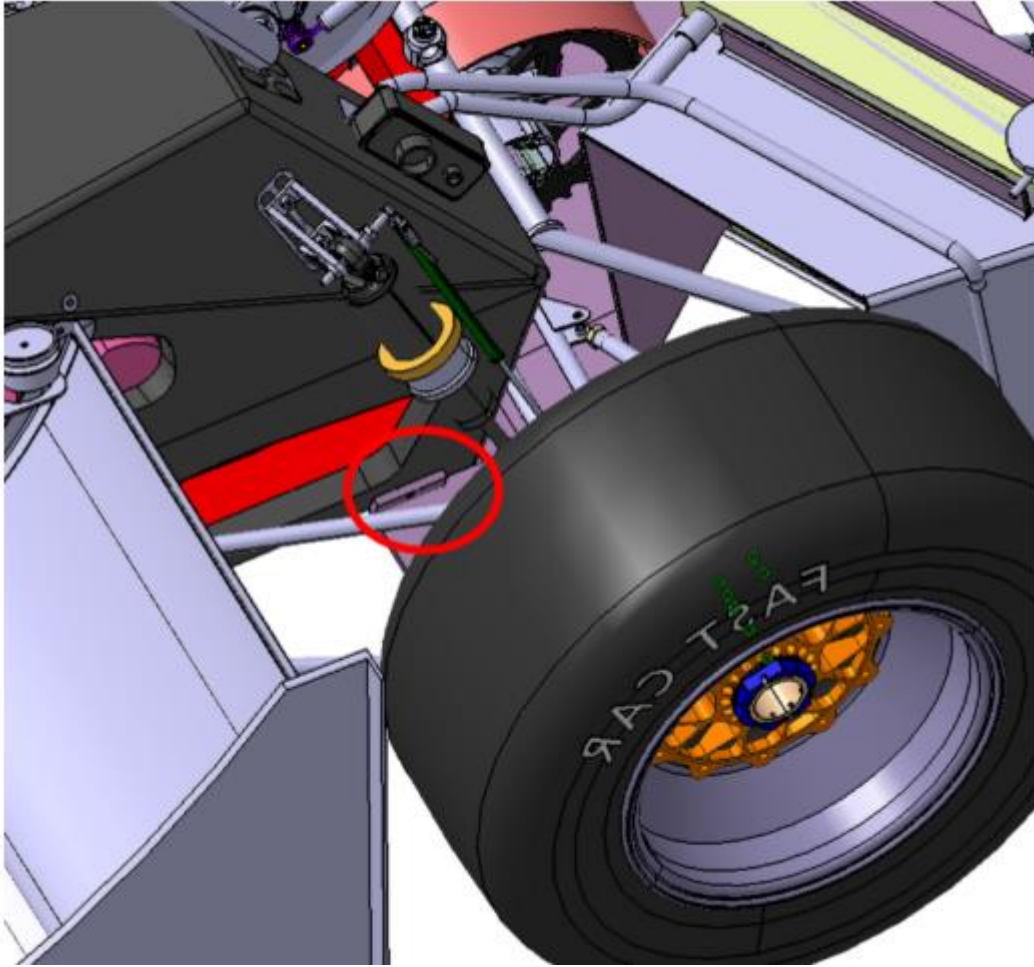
Diffuser side mounting on 2015 car chassis.
